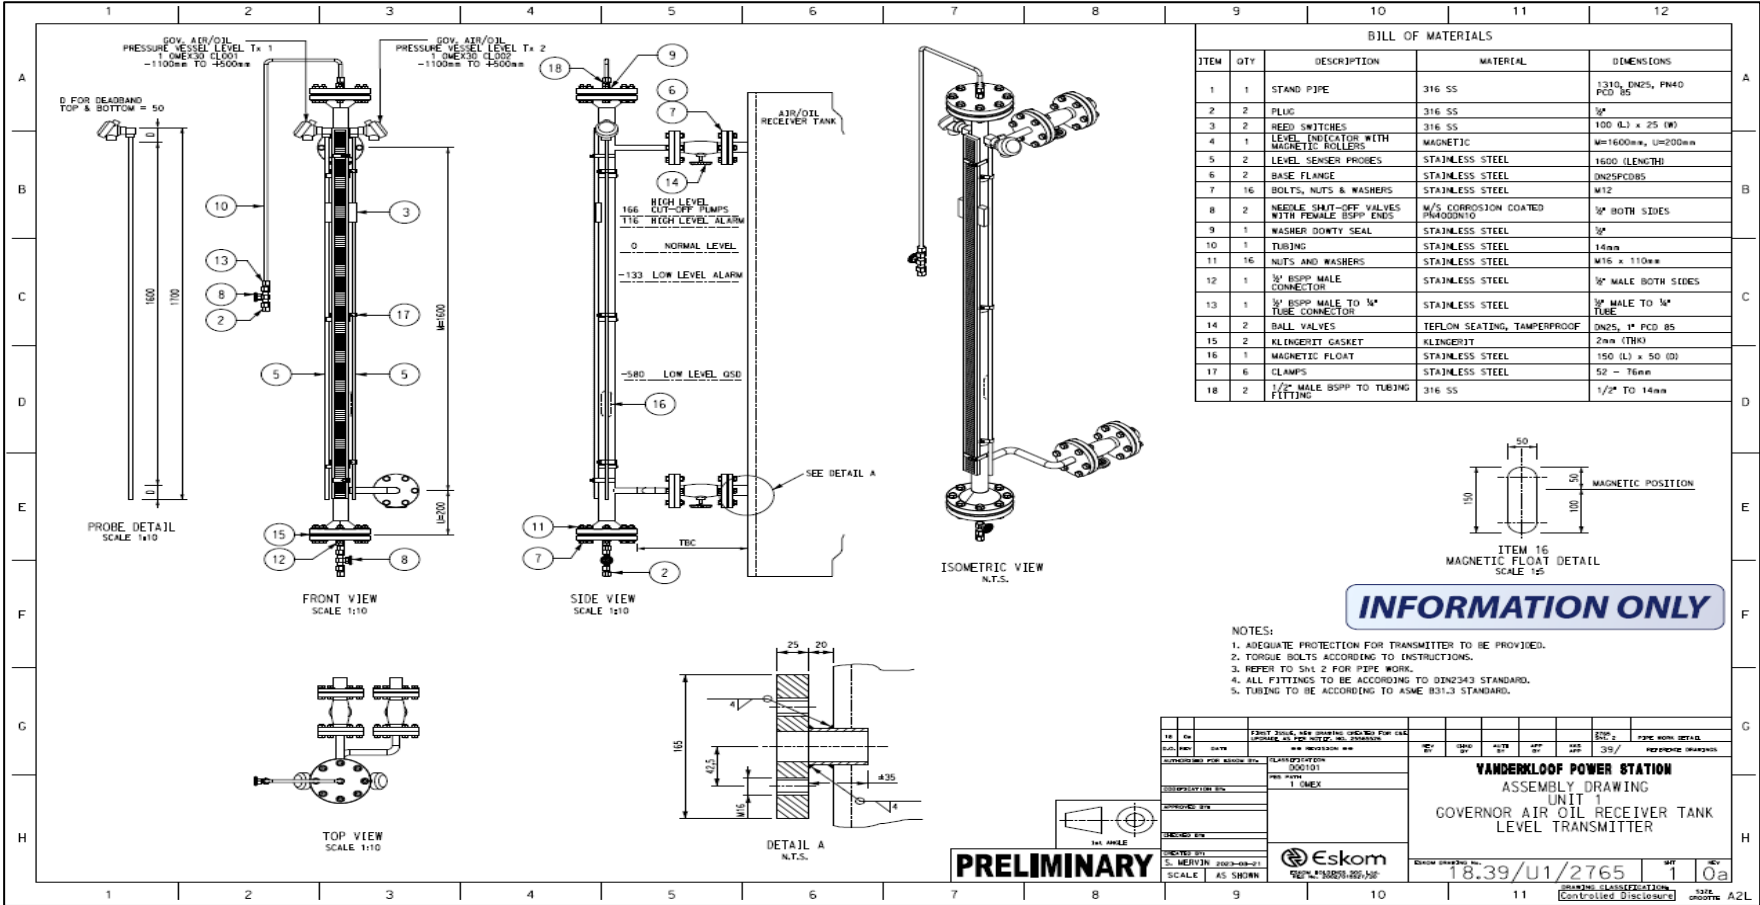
Assembly Drawing Stand-pipe Level Transmitter for Pressurised Air Oil Receiver
